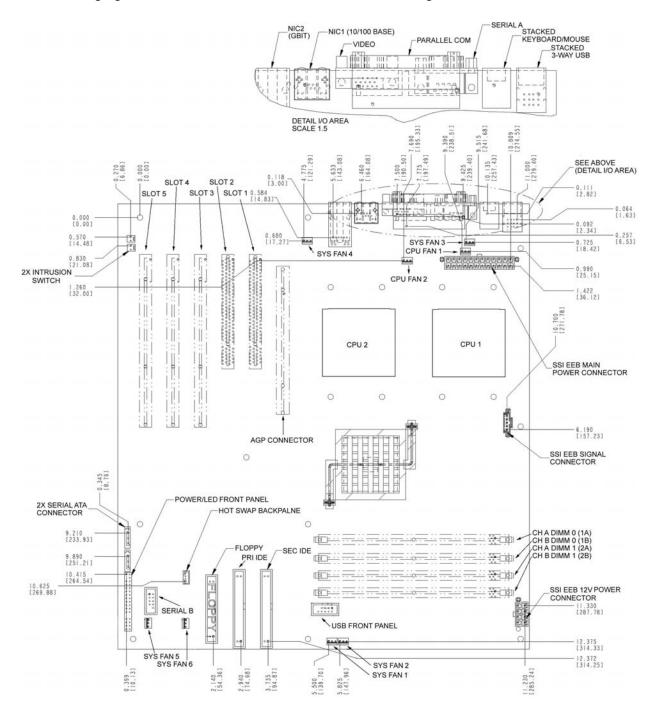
Intel Server Board SE7505VB2 Mechanical Drawing
